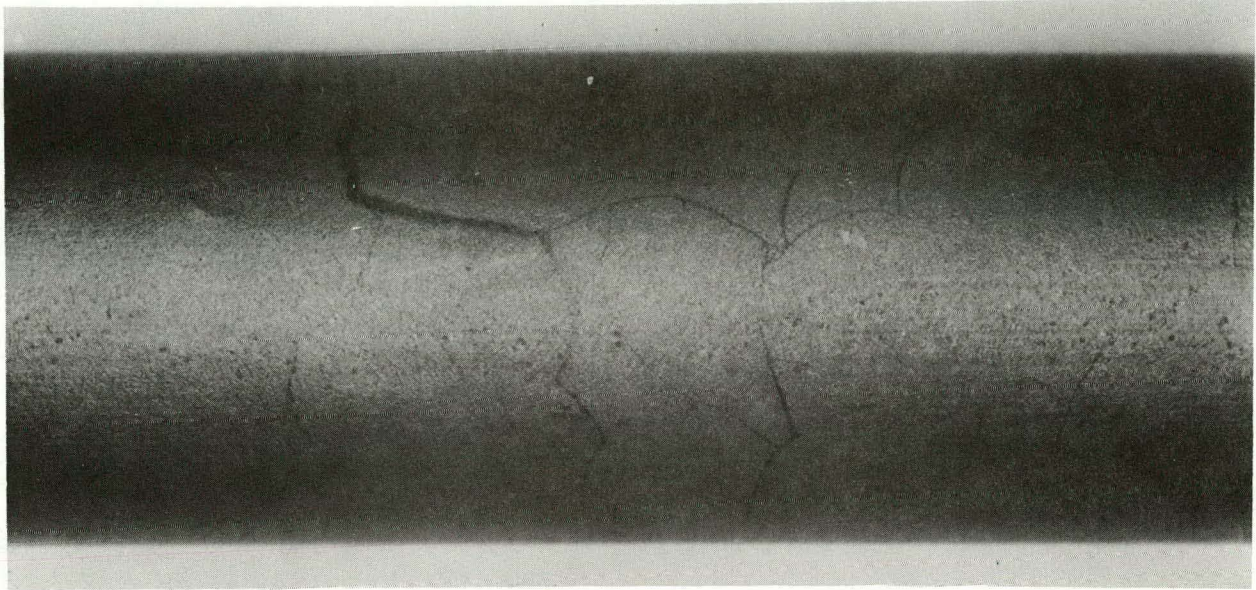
Photograph of Tube F After Cracks were Produced by Thermal Shock.
